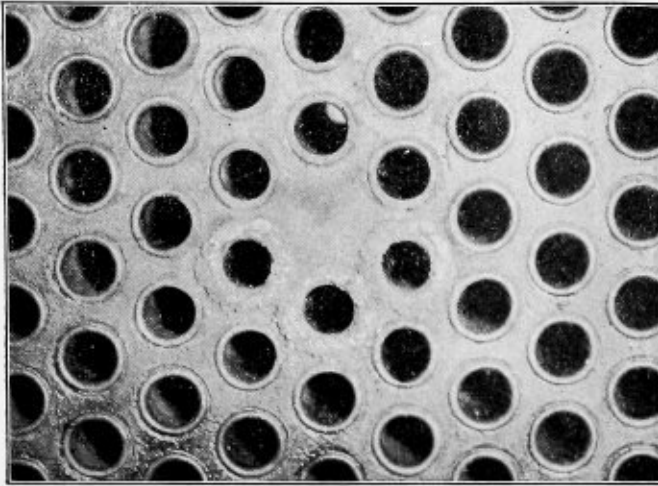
THREE TUBES WELDED IN FLUE SHEET
